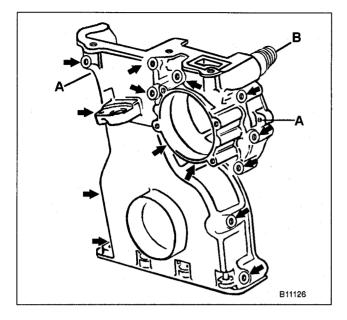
Lower timing chain cover mounting bolts (arrows) and dowel locations (A). Coolant hose fitting B is replaced by coolant pipe pressure fitting in later models.
